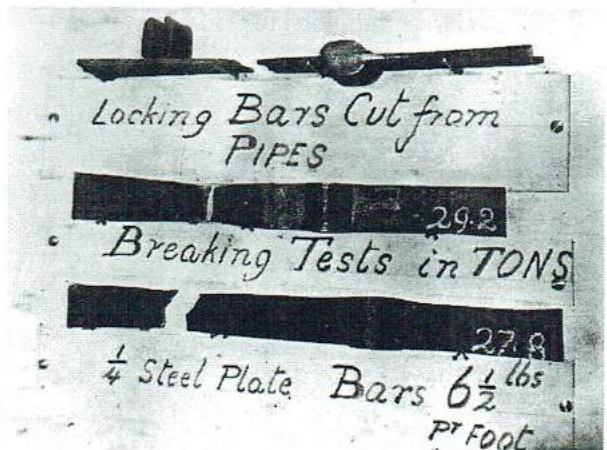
Test pieces cut from the locking bar joint which have been broken in tension. The test pieces have broken in the parent metal of the pipe demonstrating the 100% joint efficiency of the locking bar[16].
